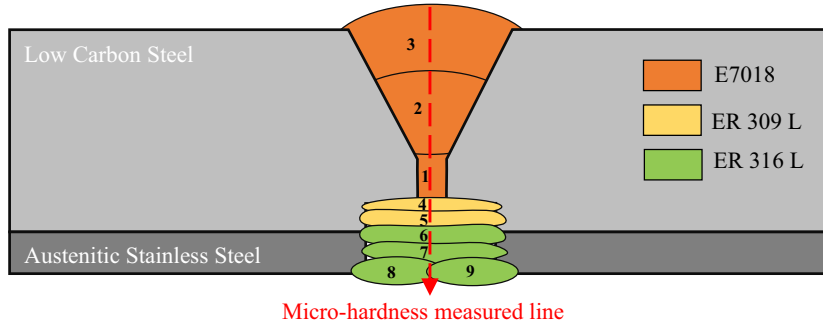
Schematic view of different passes of the stainless clad steel welding process.<sup>5</sup>
